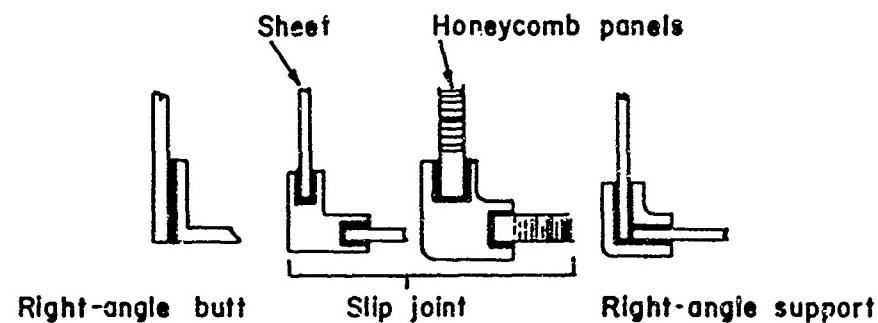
SHEET-METAL AND PANEL-EDGE JOINT DESIGNS (REF. 24)
